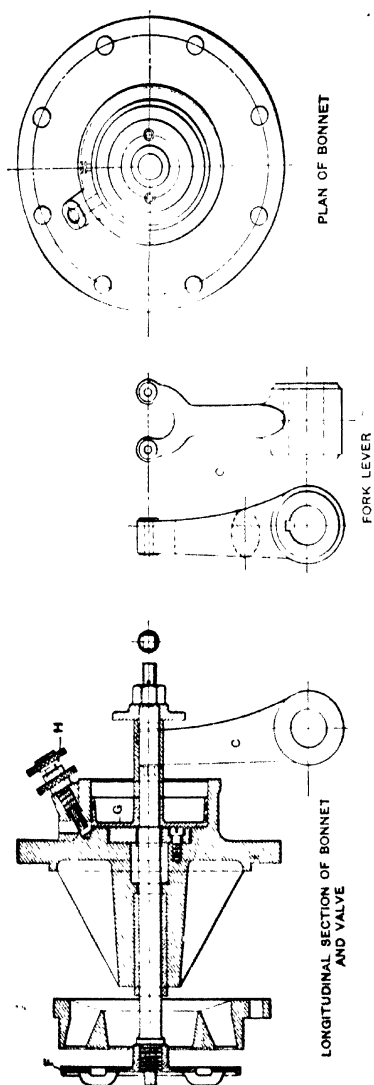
Details of Kiedler Inlet Valve (Fig. 78).
